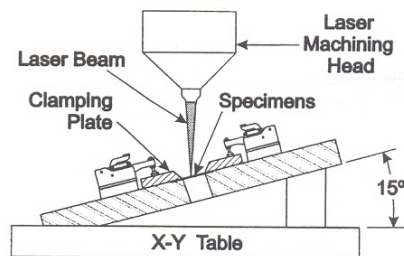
Schematic of the welding jig used in the experiments.
